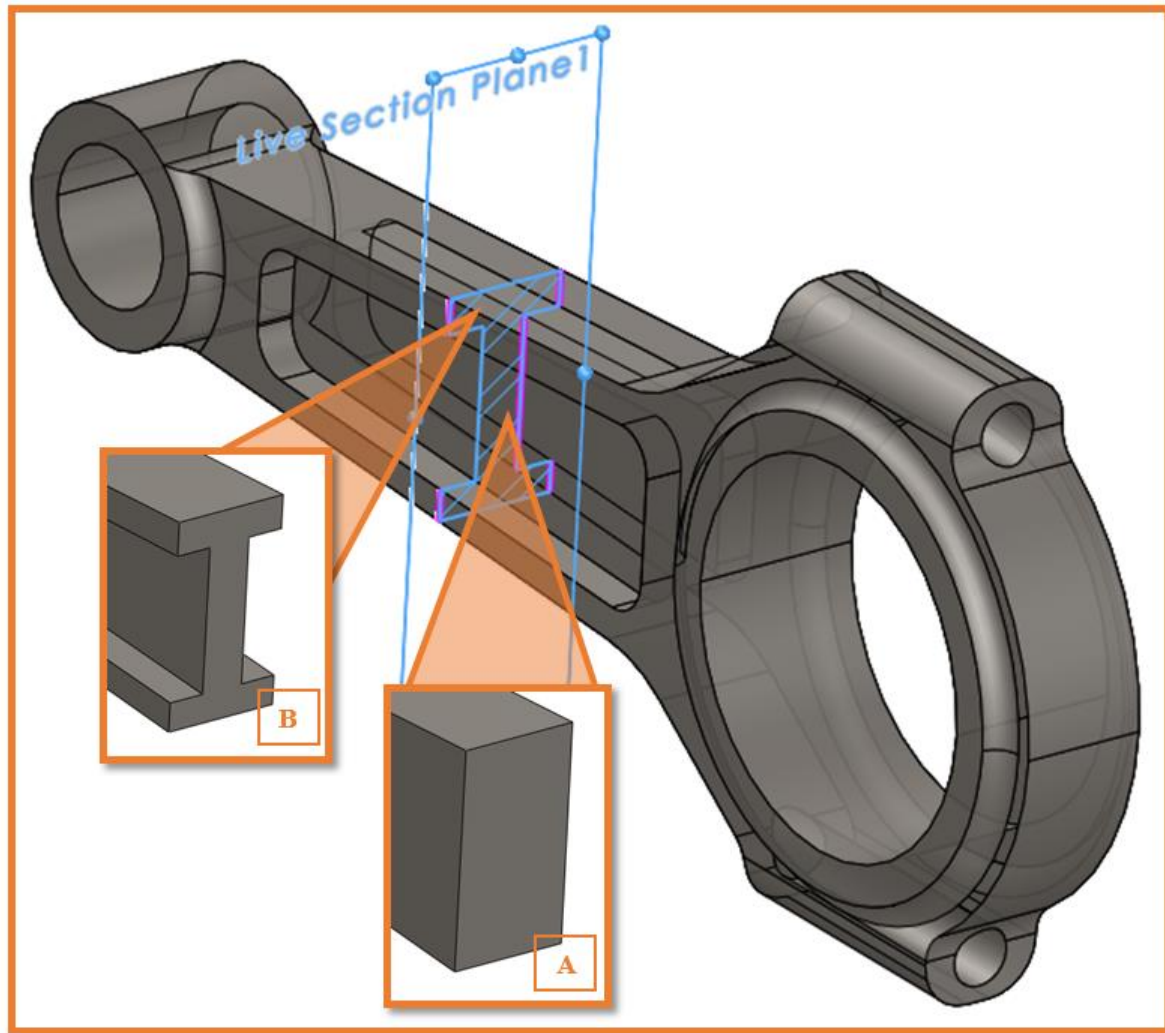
Connecting rod cross section design (a) rectangular (b) “T” beam.
